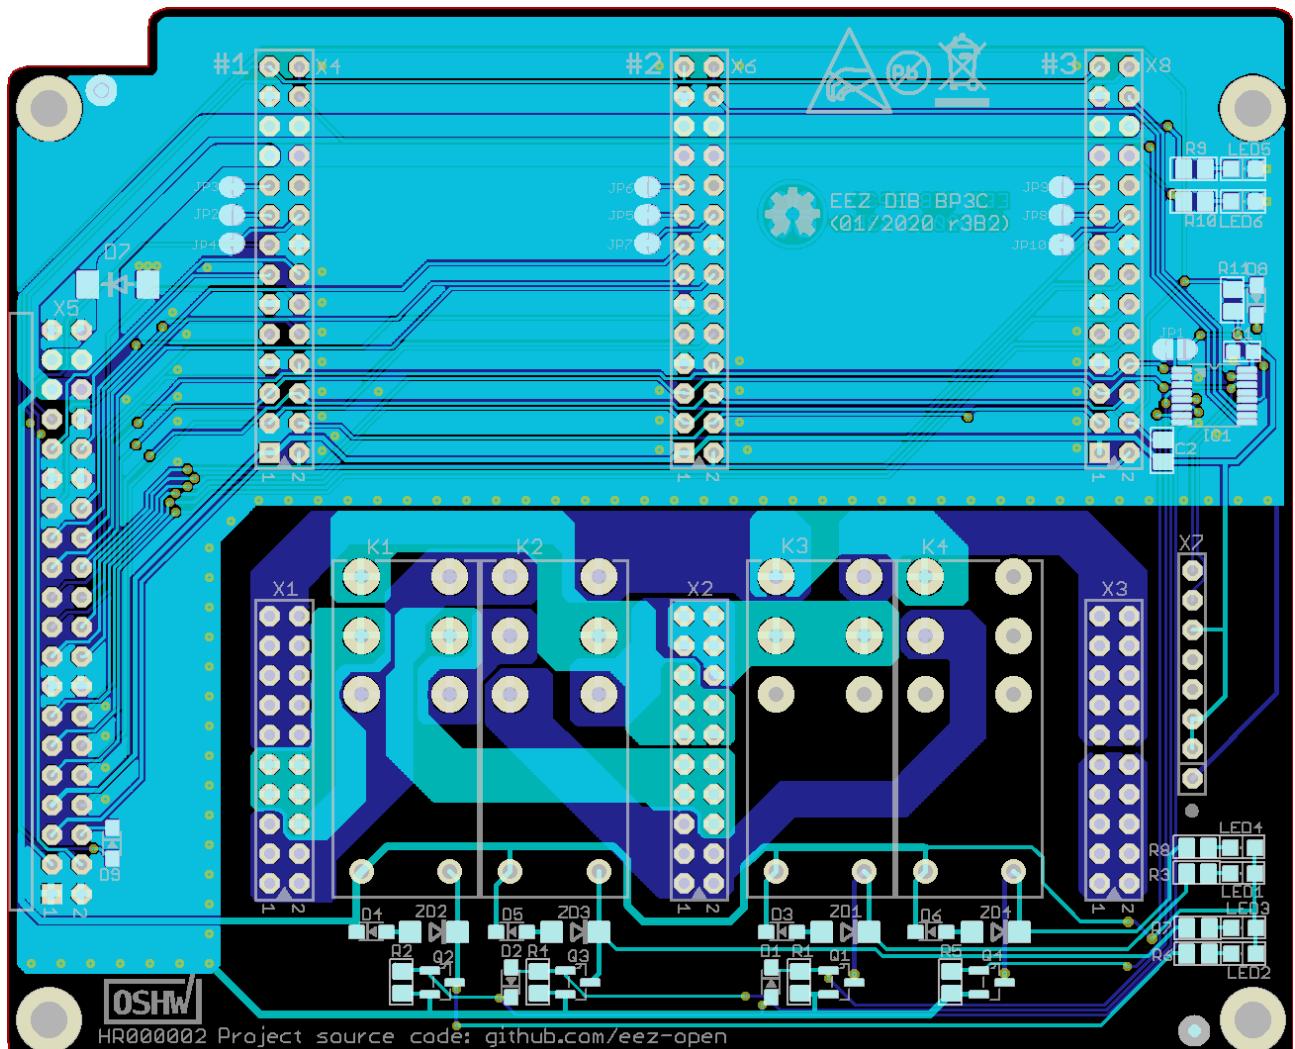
PCB Top (cyan) and bottom (blue) layer
